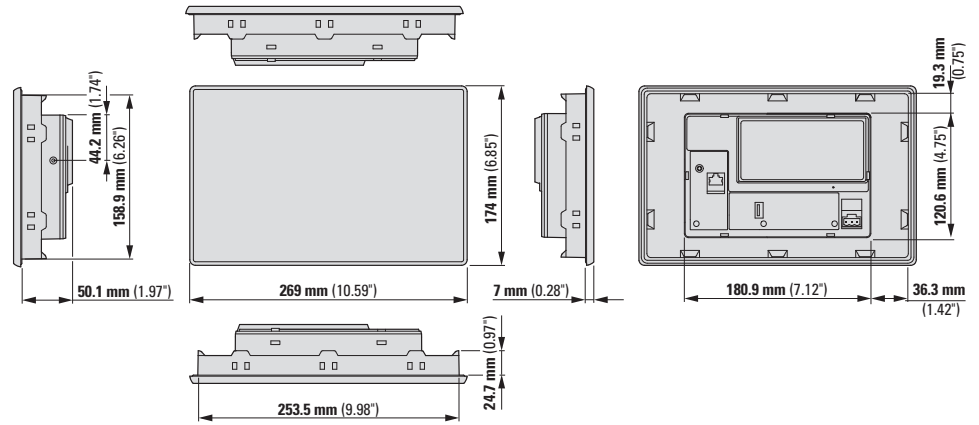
Dimensions for 10.1" front mounting devices in mm (inches)
